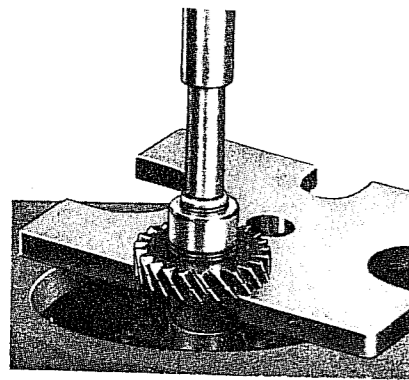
Pressing the 4th speed gear wheel off the drive pinion shaft.
